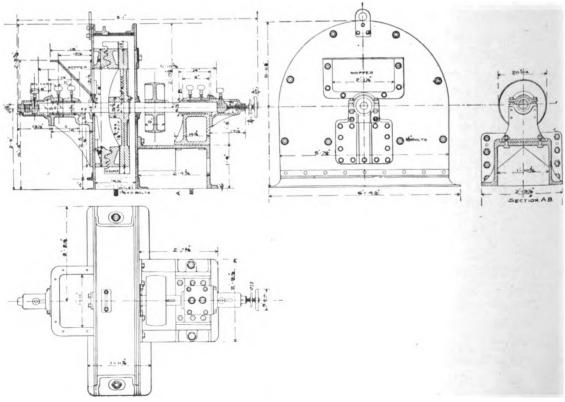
DISINTEGRATOR WITH COVER REMOVED.
